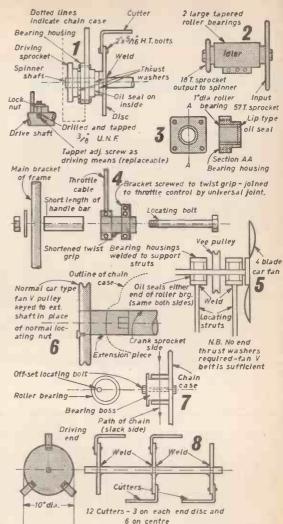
Spinner end thrust and driving device. Fig. 2— The idler. Fig. 3.—Spinner end bearings. Fig. 4.— Throttle twist grip installation. Fig. 5.—The fan drive. Fig. 6.—Fan drive pulley from crank shaft. Fig. 7.— Spinner drive chain adjustment. Fig. 8.—Spinner discs and cutters.
